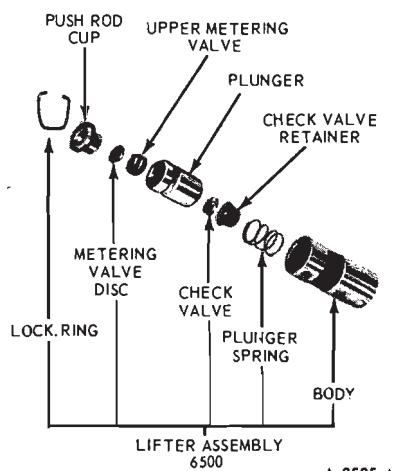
Type II Hydraulic Valve Lifter Assembly
